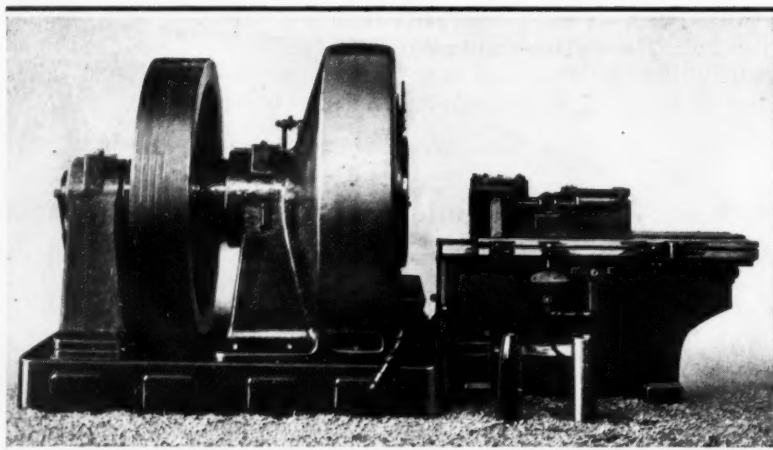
Langelier Swaging Machine Capable of Handling Work Having a Finished Diameter as Large as 6 Inches
